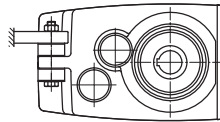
Mounting the rubber buffer (Option G and/or VG) on parallel shaft gear units
